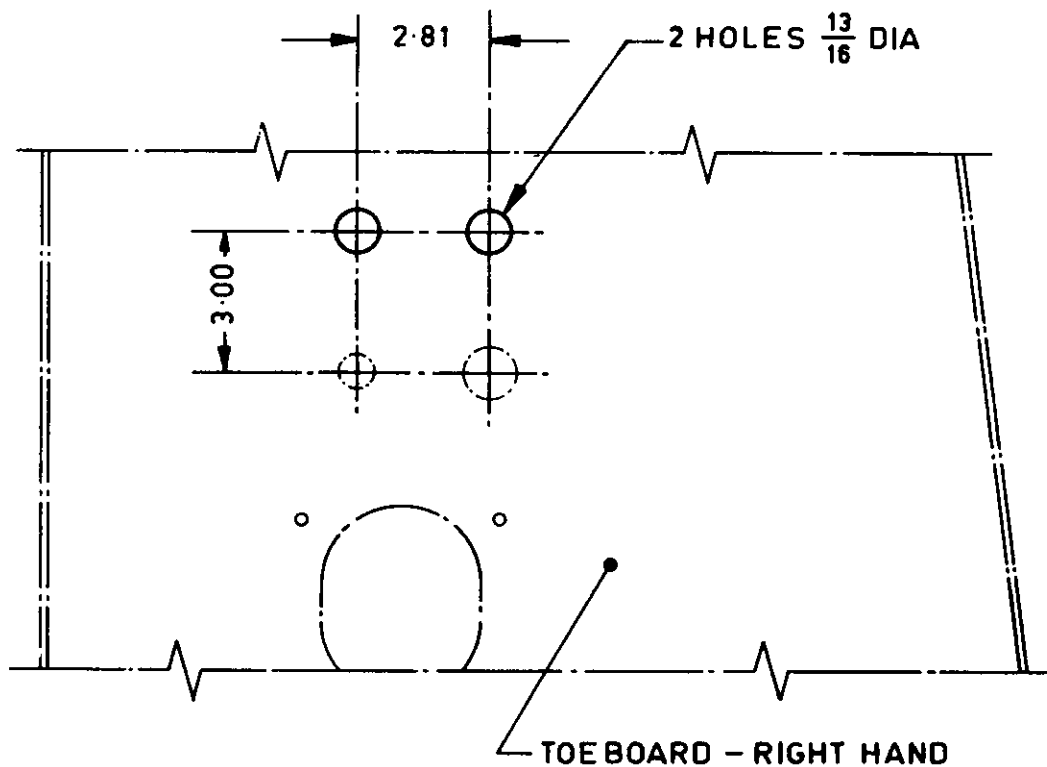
DRILLING TOE PANEL ASSEMBLY
